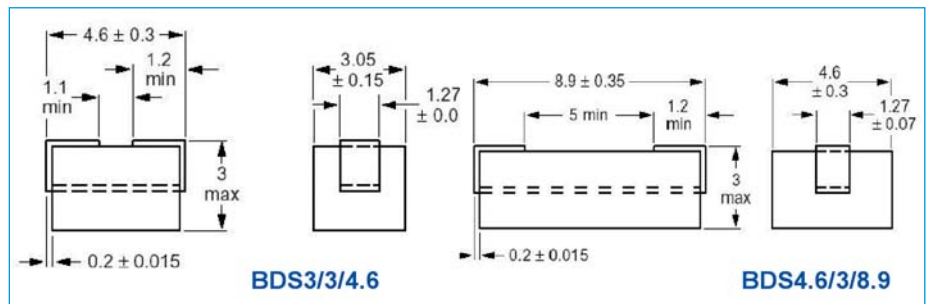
Gapped SMD chip beads dimensions (in millimeters)
